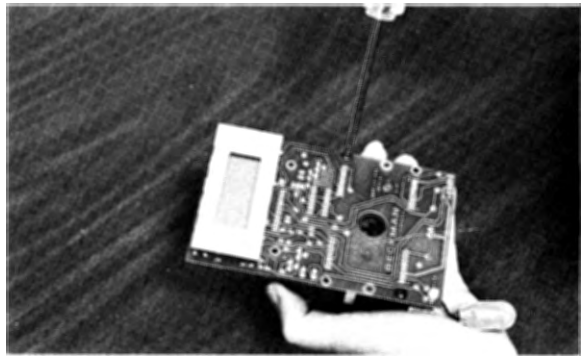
Removal/Replacement and Inspection Procedure — Electronics Assembly
